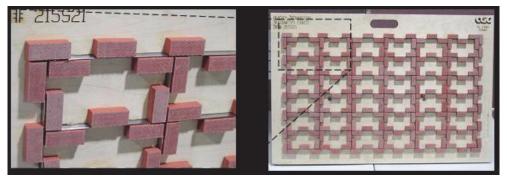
New Die Design with Smaller Tolerance in the BC Bag Dimensions
